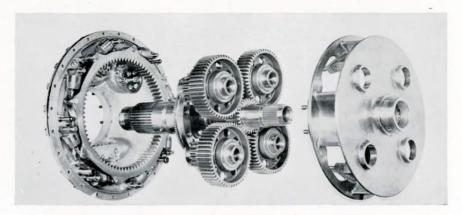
,200 h.p. 9,000/1,070 r.p.m. Bristol Theseus gear
